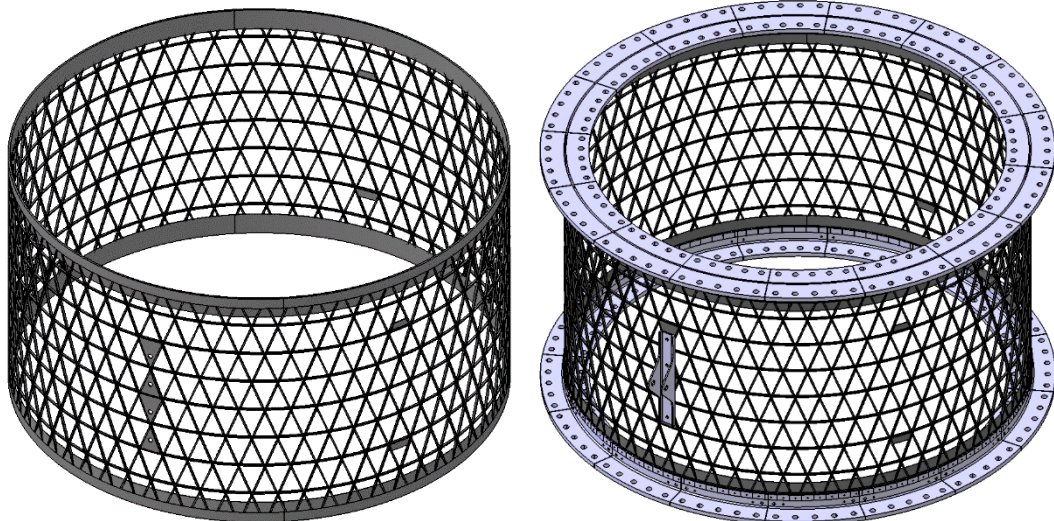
1.5 m diameter test article design. Left – Composite part. Right – Assembled with metal fixtures.
